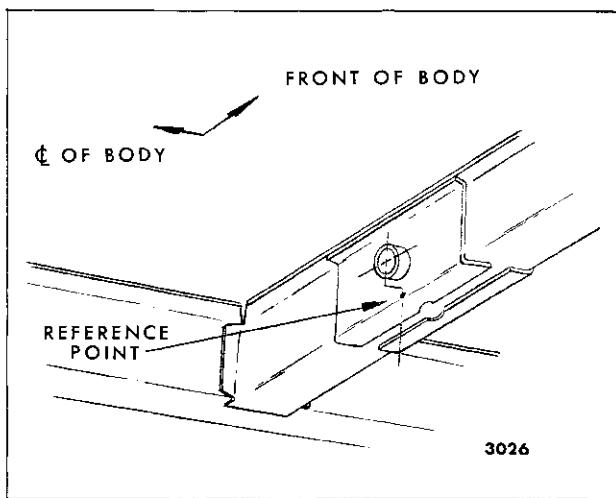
Side Rail at Rear Spring Rear Shackle Bushing
